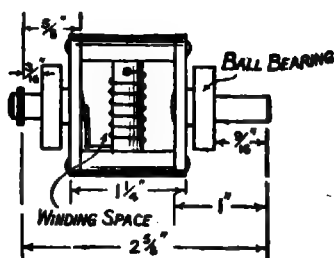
Complete Armature, showing Method of Winding and Attaching to Insulated Contact
